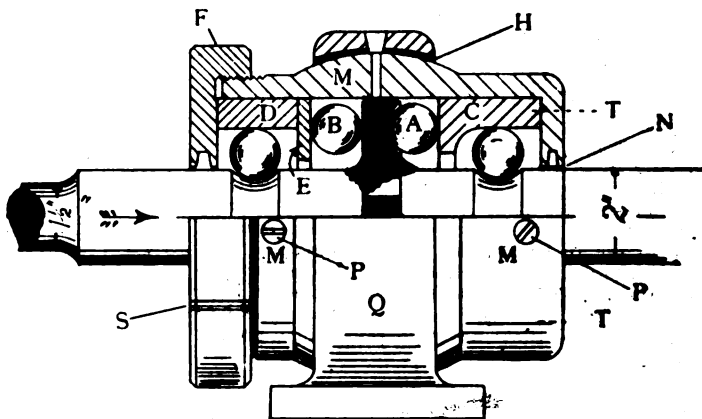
BALL BEARING THRUST BLOCK FOR BOAT.
